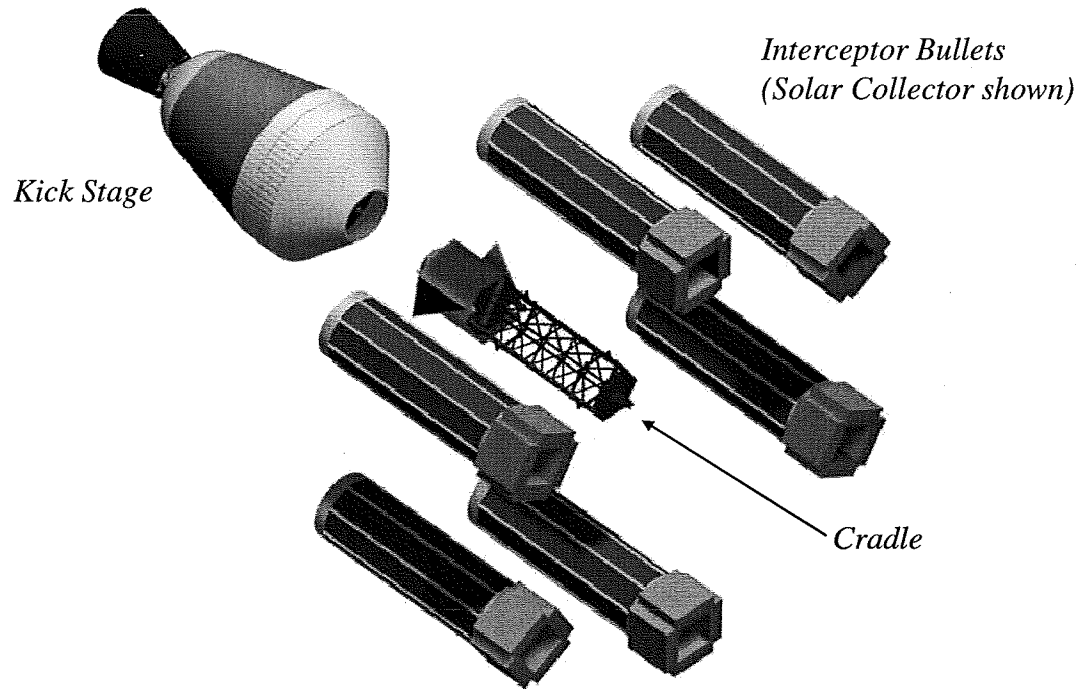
Exploded view of cradle, kick stage and solar collector bullets in unfolded condition.
